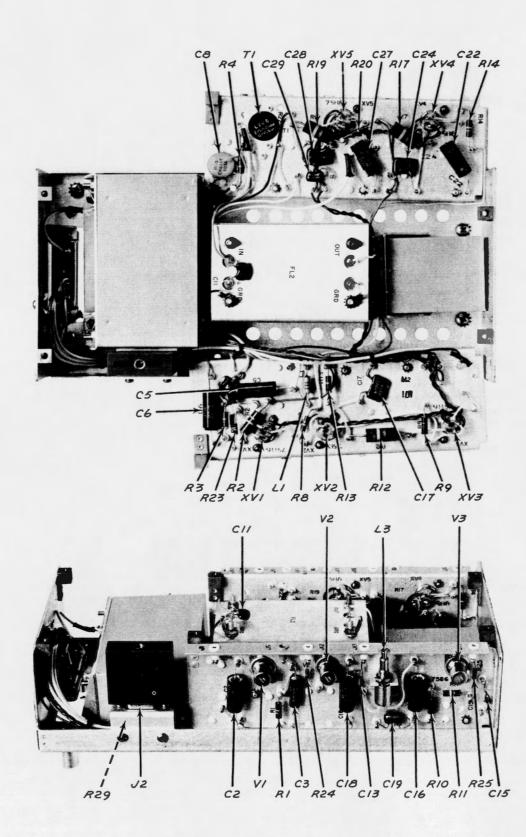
2nd Injector (B) A1A11, Parts Location and Test Points, Disassembled
